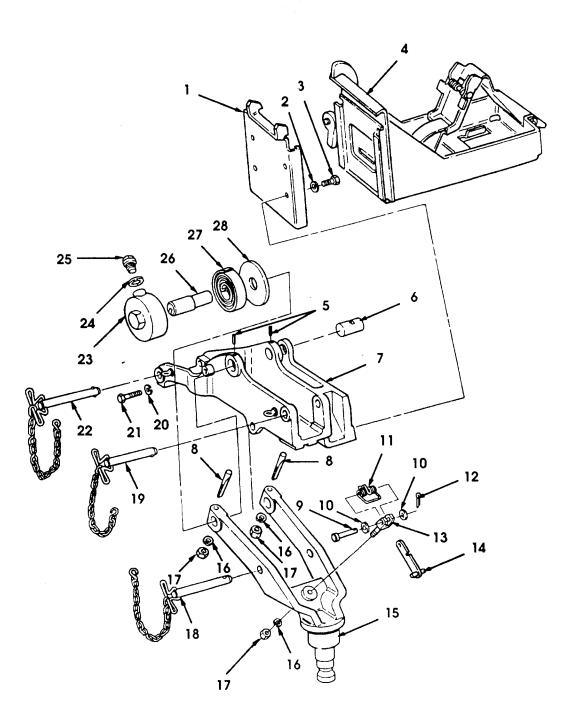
Mount, Machine Gun, Cal .50, 6650 7046650.
